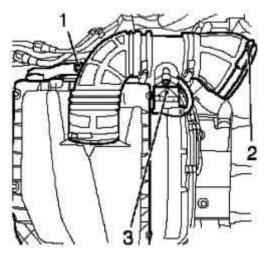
Components, shooting in the dismantling of the air filter: 1 - attachment bolt, 2 - clamp, 3 - the wiring harness connector sensor mass air flow
